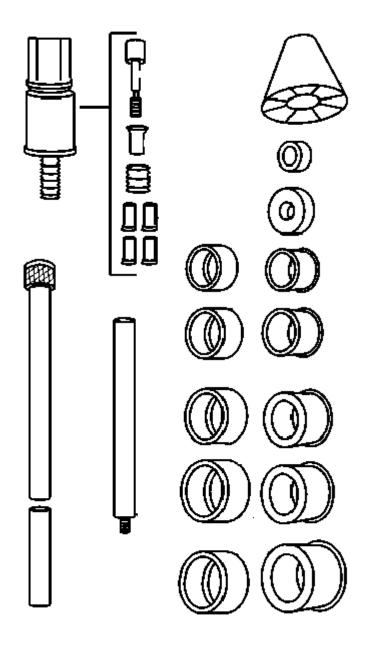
Camshaft Bearing Service Set Courtesy of GENERAL MOTORS CORP.
